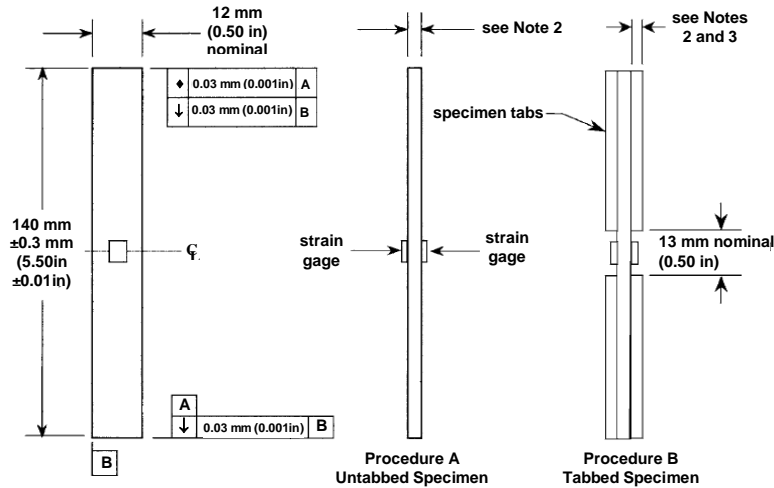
Specimens and Dimensions of Compressive Test Specimens [12]
